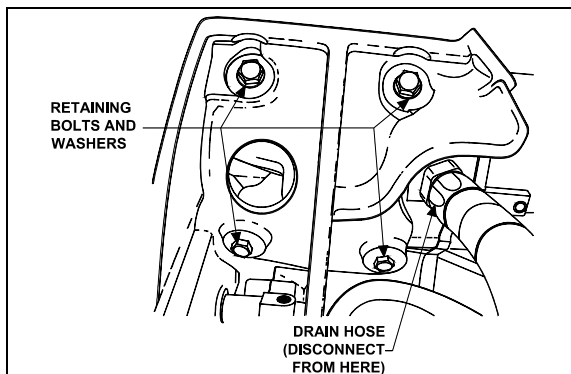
ALTERNATOR RETAINING BOLTS AND WASHERS 06350
